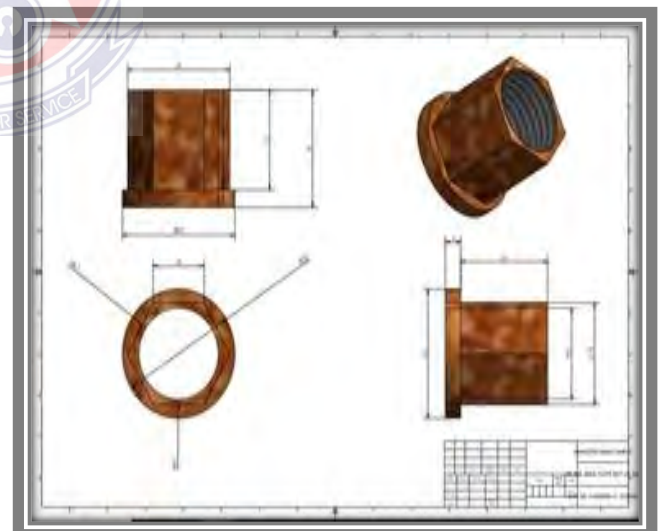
, SN 36B: Movable Wheel Port/Pump Back Plat Nut
